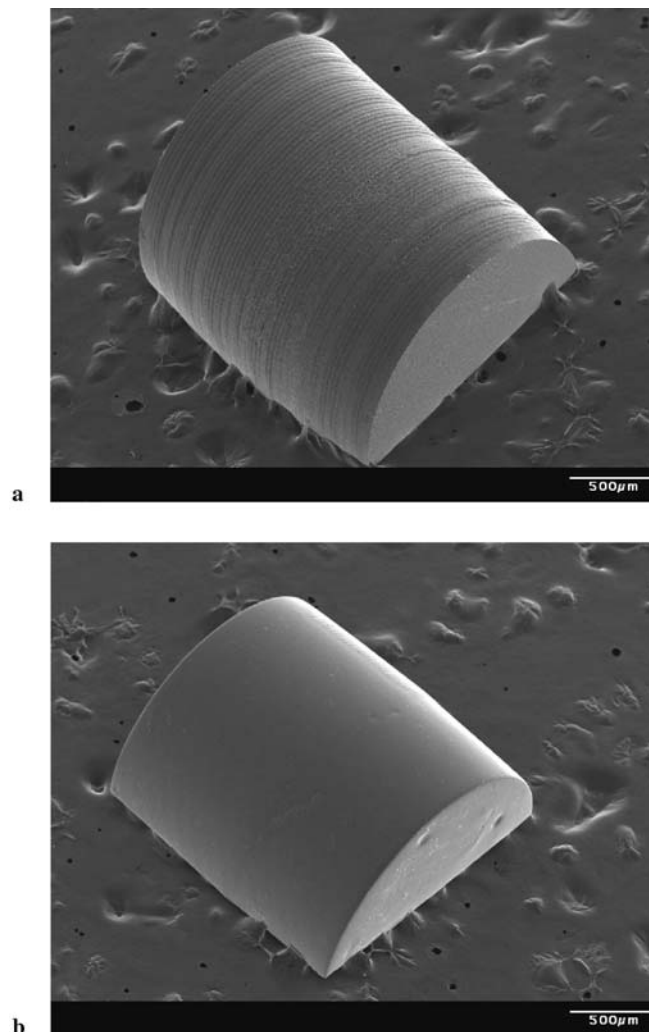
SEM images of microoptical cylindrical lenses fabricated by fs laser 3D micromachining. (a) Without a final smoothing step; (b) With a final smoothing step
